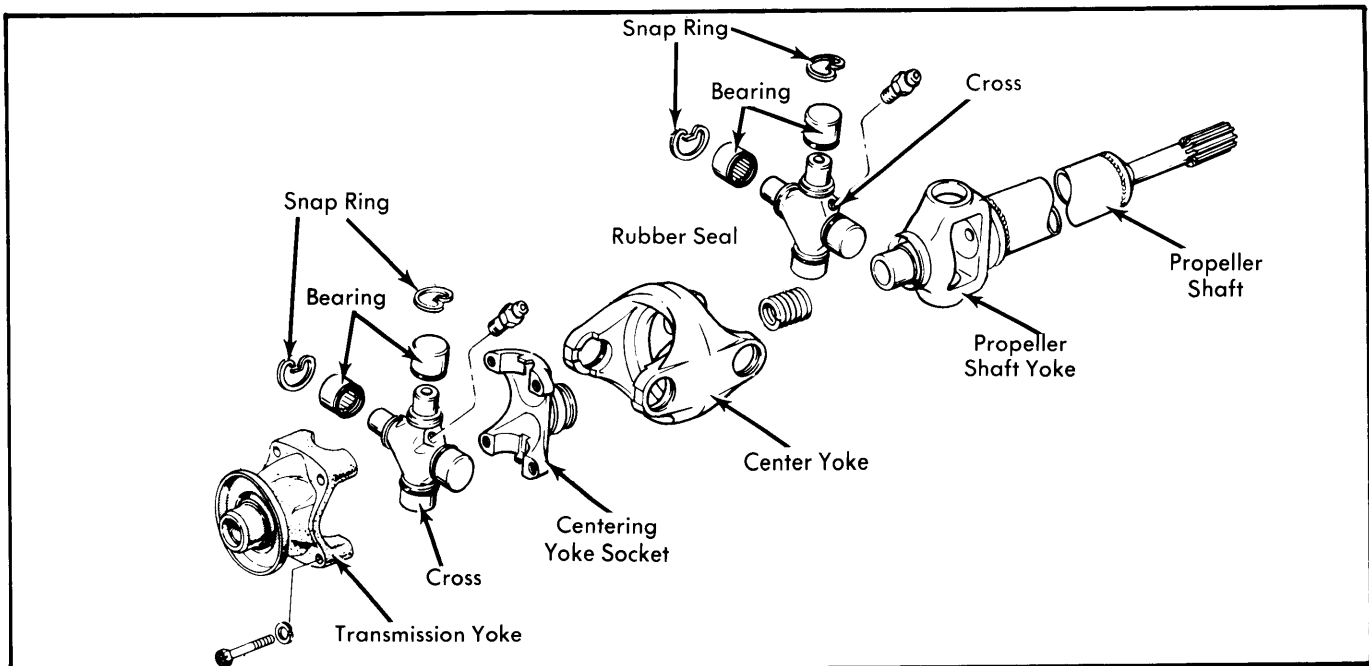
Exploded View of Ford Constant Velocity Type Universal Joint
